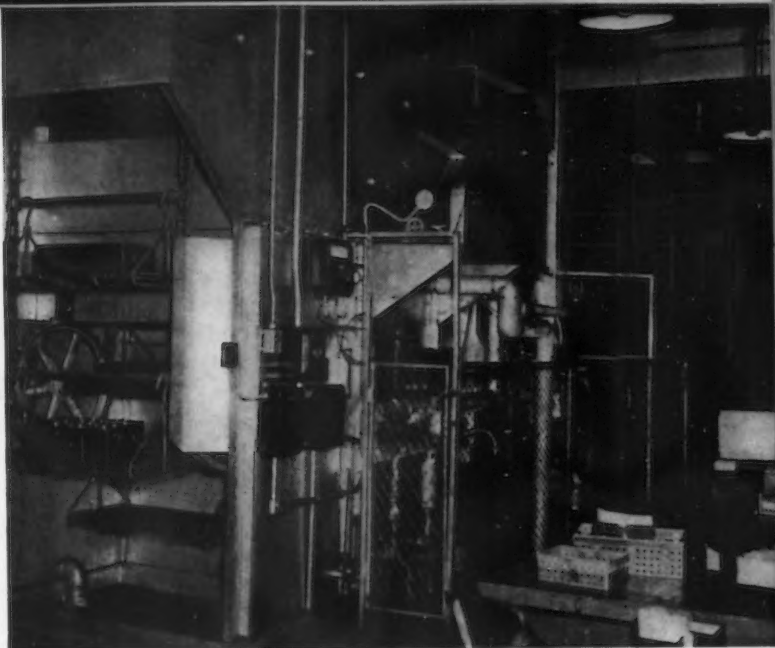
Parts leaving this washing machine are sprayed with oil and go to parts storage.
